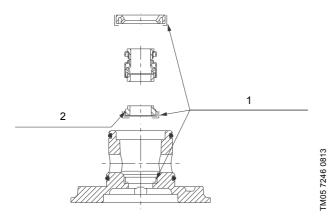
Shaft seal assembly, 0.9 - 1.5 kW
